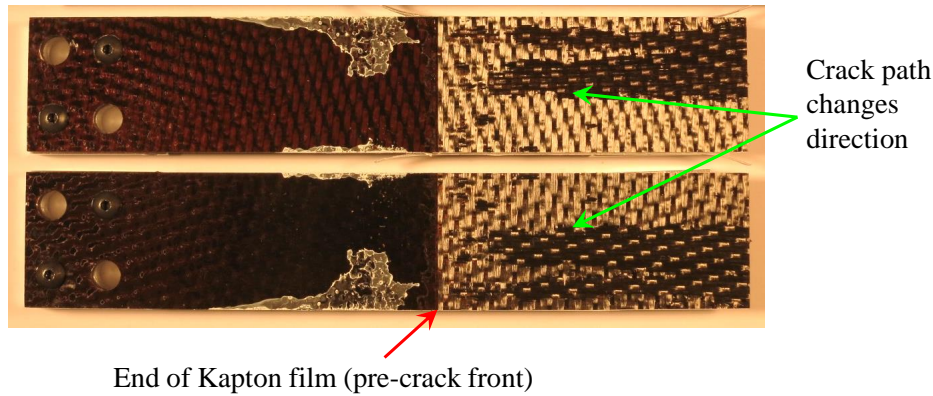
Example of crack front changing interface in the non-hybrid DCB specimens. Fracture surfaces of specimen 6 tested at 25 °C are shown in this figure.
